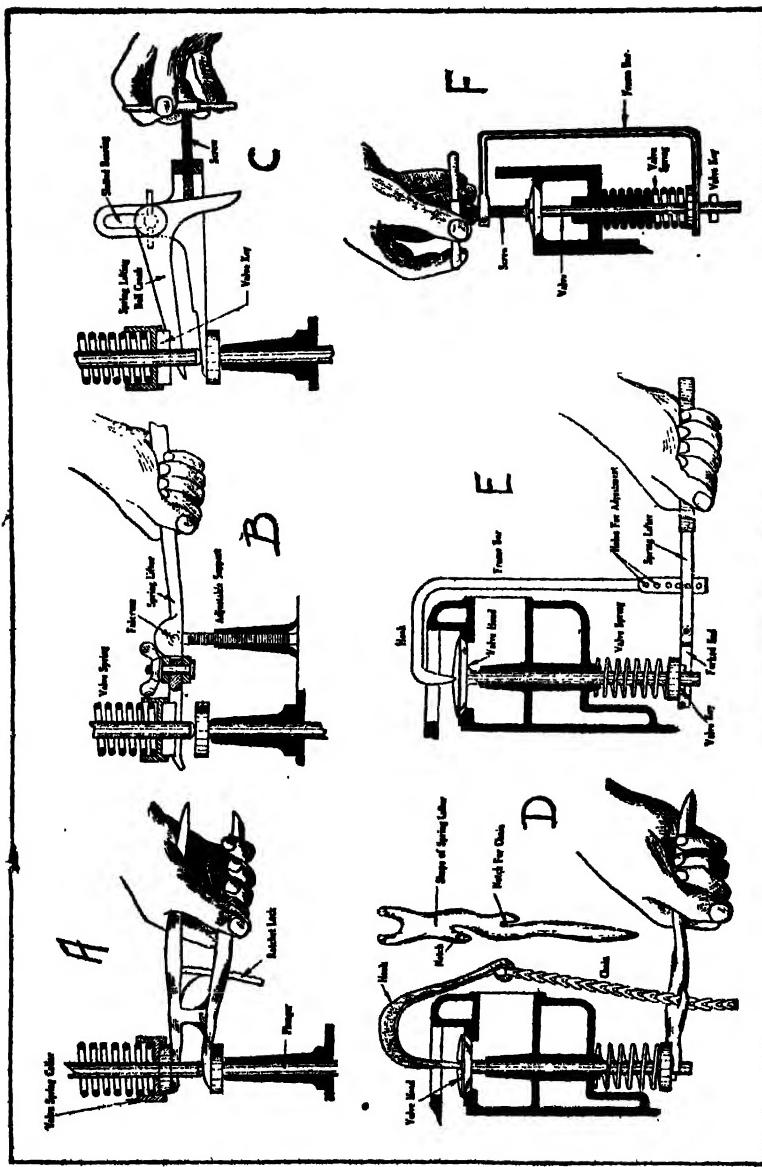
Application of Valve Spring Compressing Tool to Permit Removal of Valve Stem Keys.
